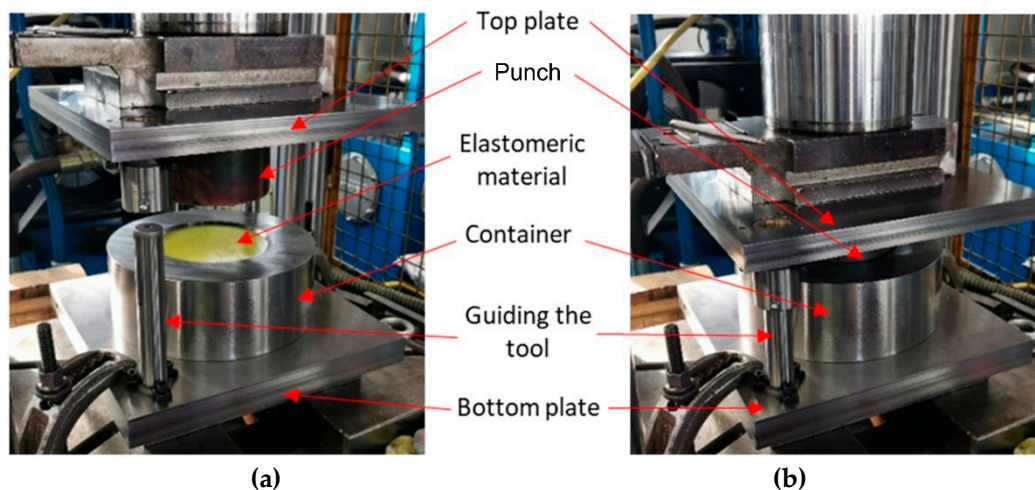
Stamping die (a) mounted on a press and (b) during forming.
